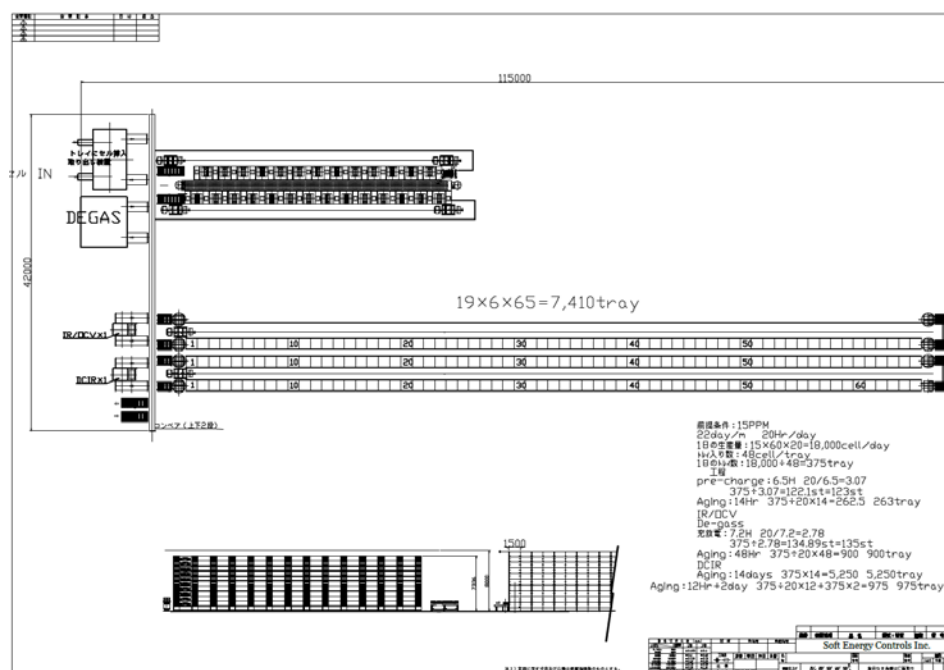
Drawing of Charge / Discharge Inspection Equipment
